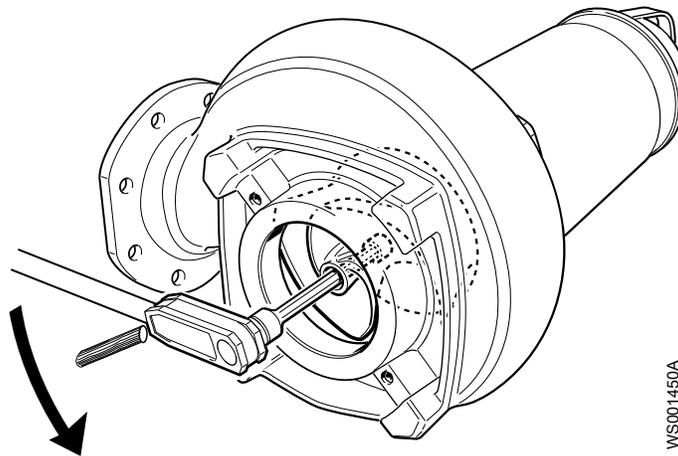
Turning the adjustment screw counterclockwise. Generic drive unit shown.
